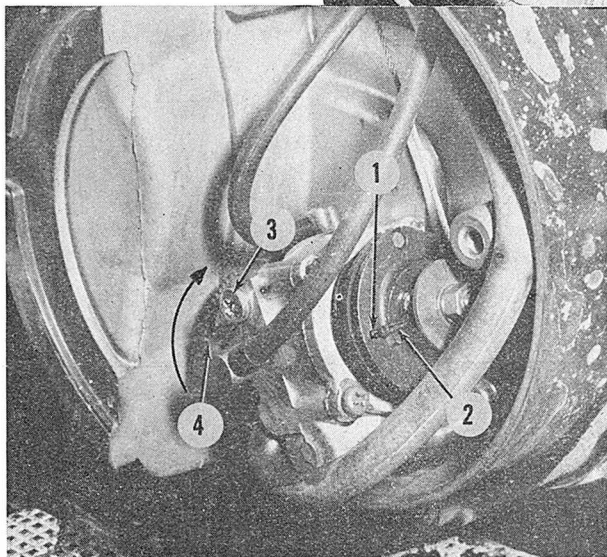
Adjust pump cable so that marks align as slack is just taken up in throttle cable.
